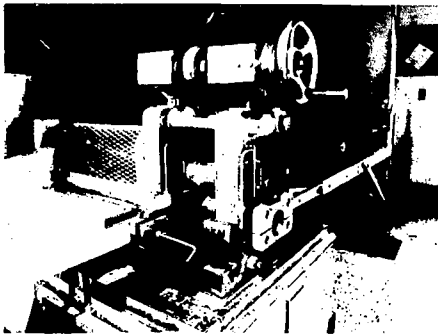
Rolling Mill Used to Form Trapezoidal-Shaped Grid Wires
